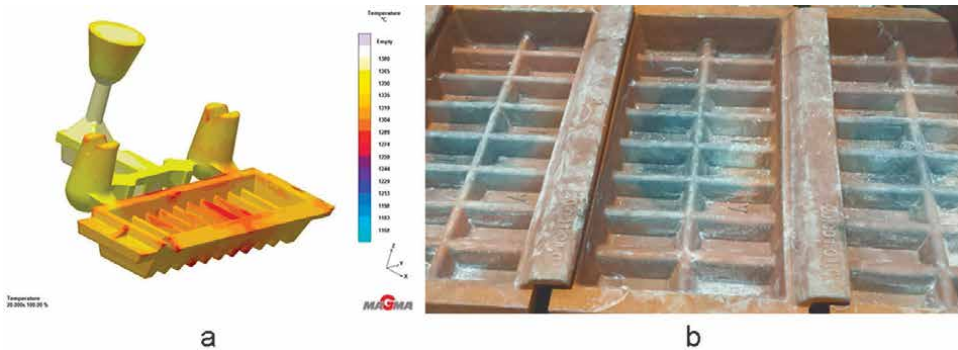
Mould for pouring AL alloys and casting ingots (a/ casting technology, b/ working surface). Material for casting moulds—Ductile cast iron or, more rarely, vermicular cast iron.
